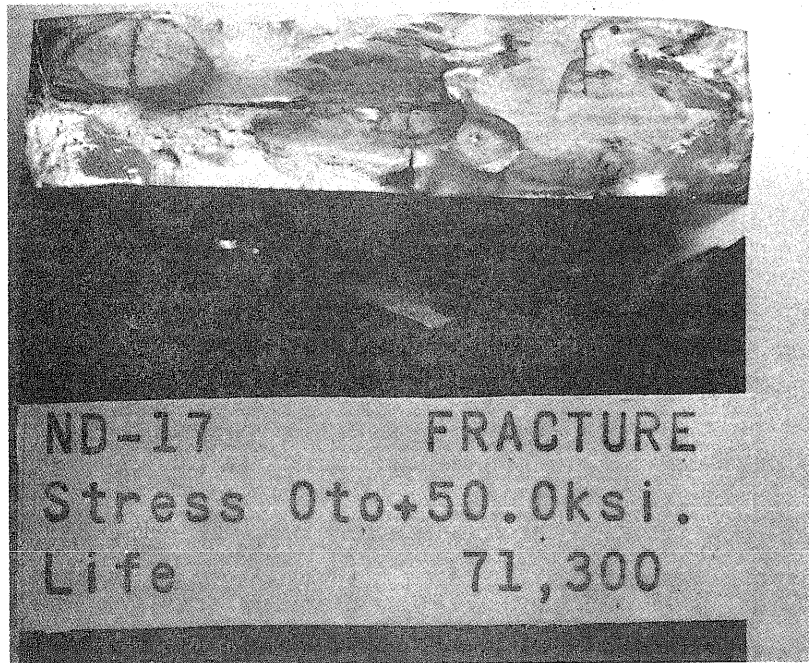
FRACTURE SURFACE, AND ULTRASONIC INDICATIONS RECORDED FOR SPECIMEN ND-17
